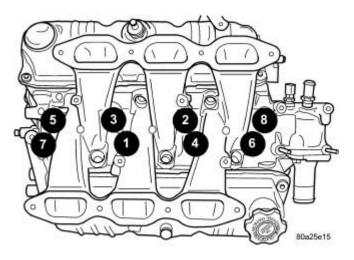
LOWER MANIFOLD TIGHTENING SEQUENCE Courtesy of CHRYSLER LLC
